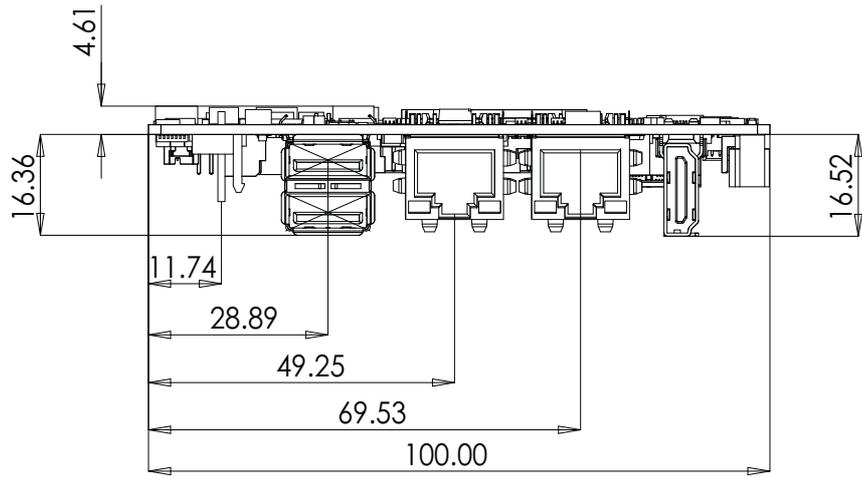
MIO-2361 Mechanical Drawing (Side View)
